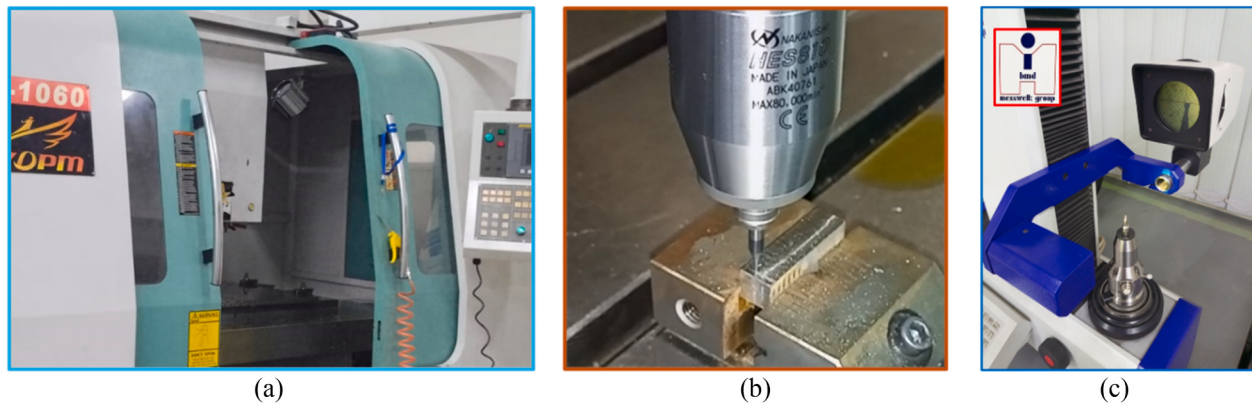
Experimental setup components: (a) Vertical milling machine; (b) Machining operation; (c) Tool Pre-setter.
